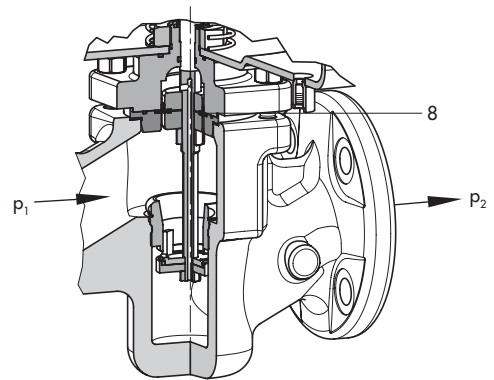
Type 2405 Pressure Reducing Valve with pressure balancing · K_{VS} 6.3 to 32
